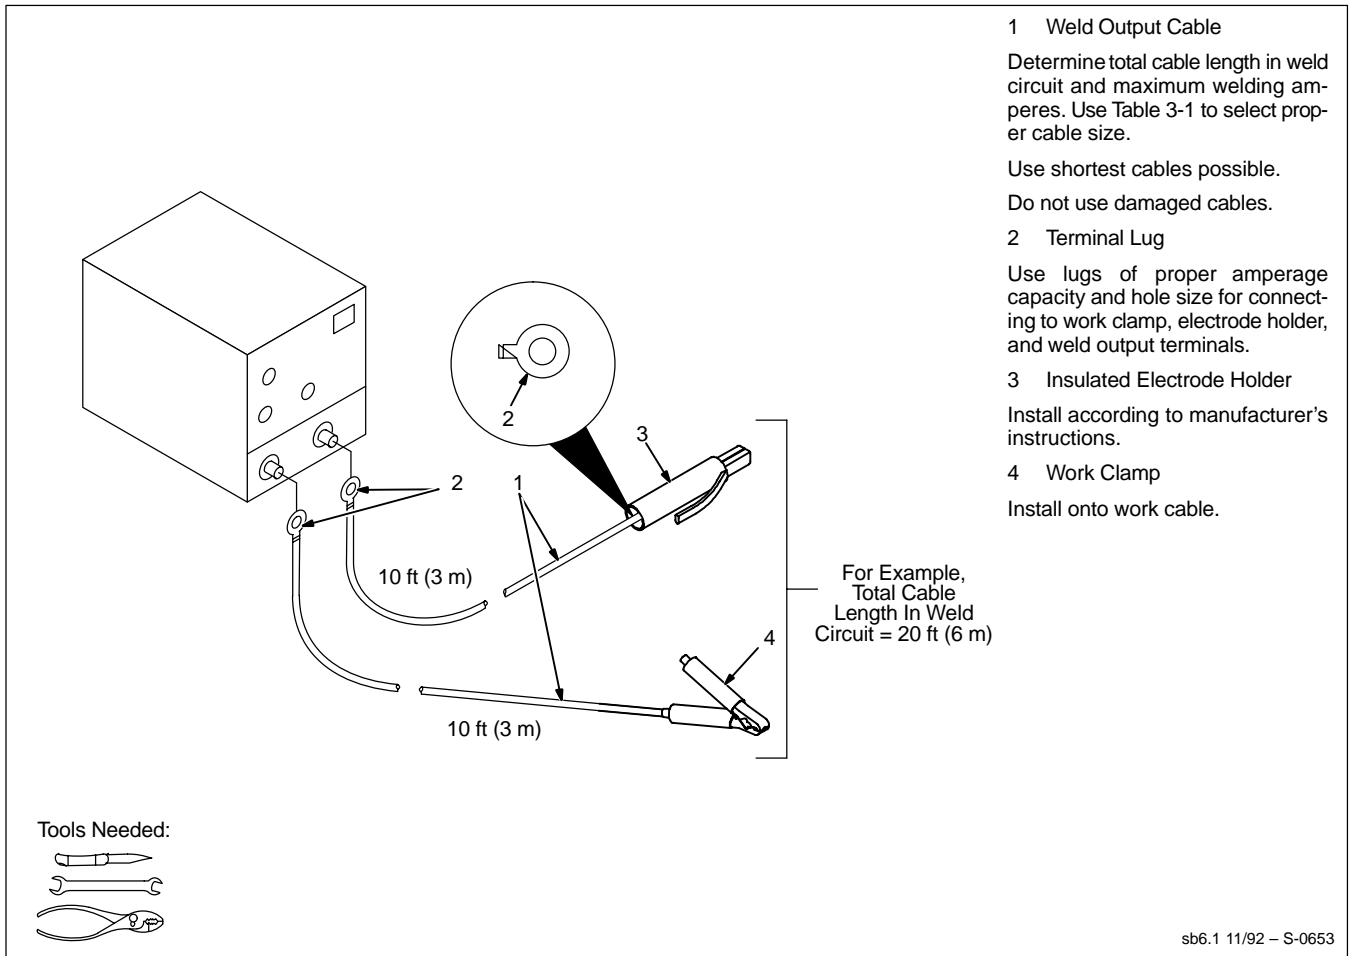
Selecting And Preparing Weld Output Cables
